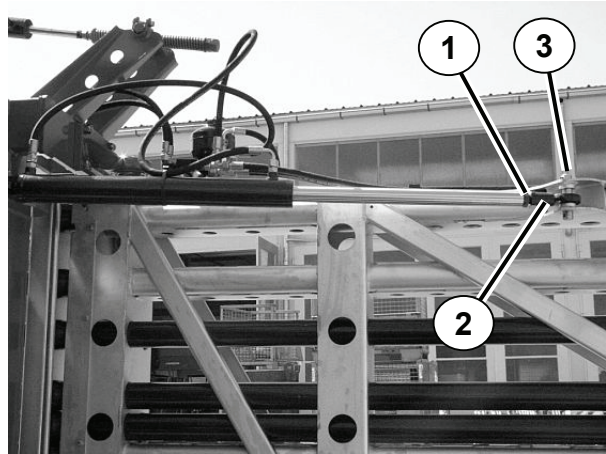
Adjust the holding tension on the boom start section (unfolded boom)
